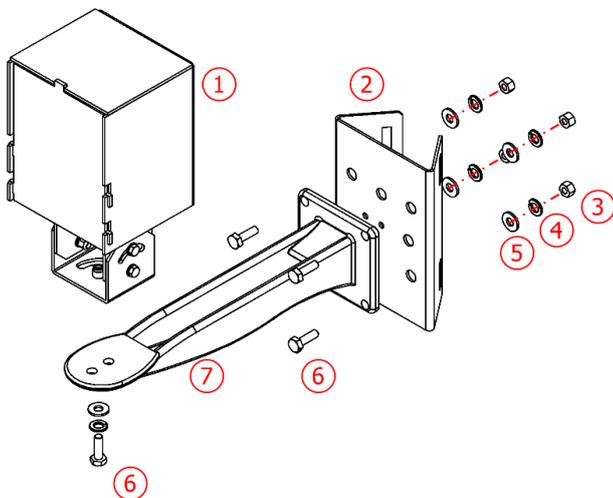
ITSLUX Illuminator Cage Bracket Parts
